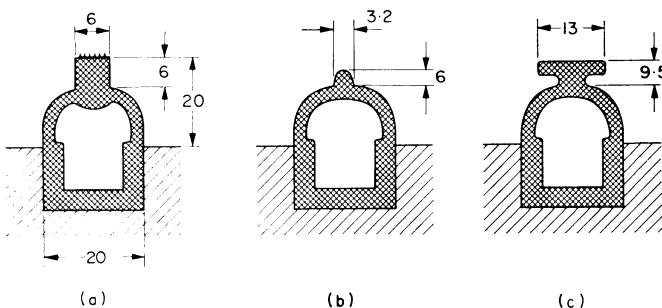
Inflatable rubber gasket seals: gasket with (a) square bead; (b) round bead; (c) T-bead (after Ballif⁷⁷)
